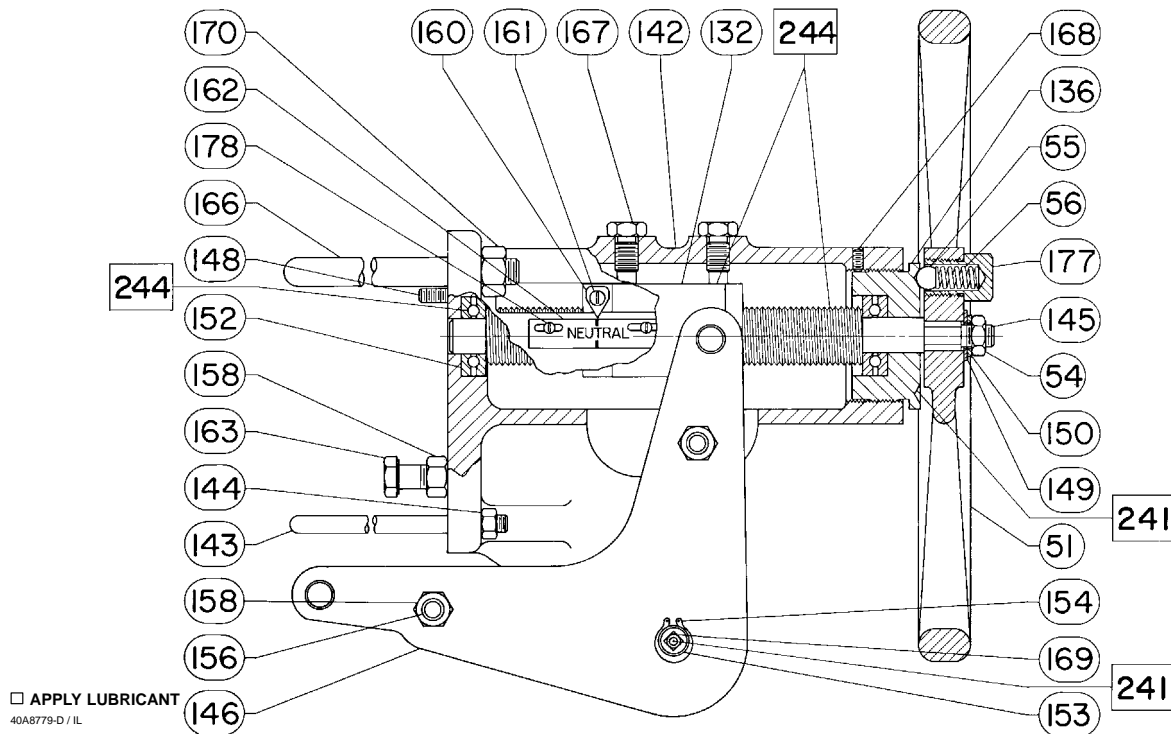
Side-Mounted Handwheel Assembly for Size 45 and 60 Actuators
